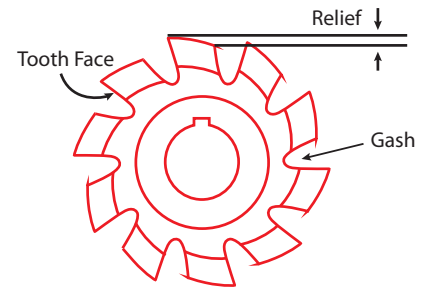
This side view of a hob shows how each cutting tooth is relieved radially to provide chip clearance behind the cutting edge.
